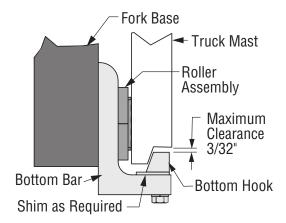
Adjusting sideshifting lower bolt-on hook assembly
